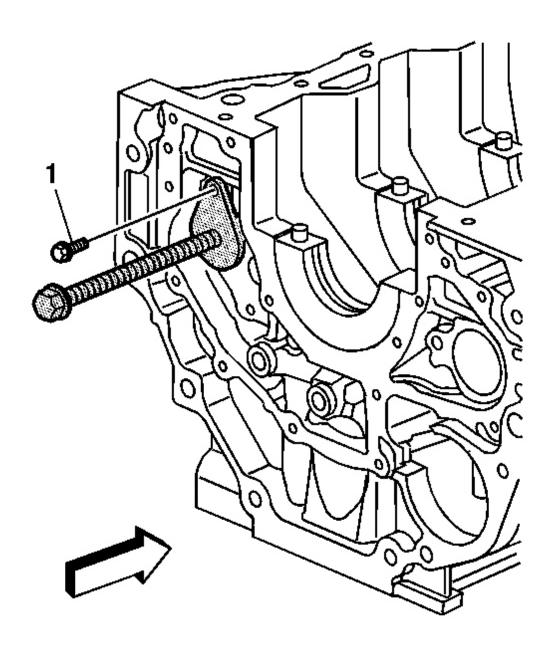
Installing Right Balance Shaft Mounting Bolt To J 44225 Courtesy of GENERAL MOTORS CORP.
